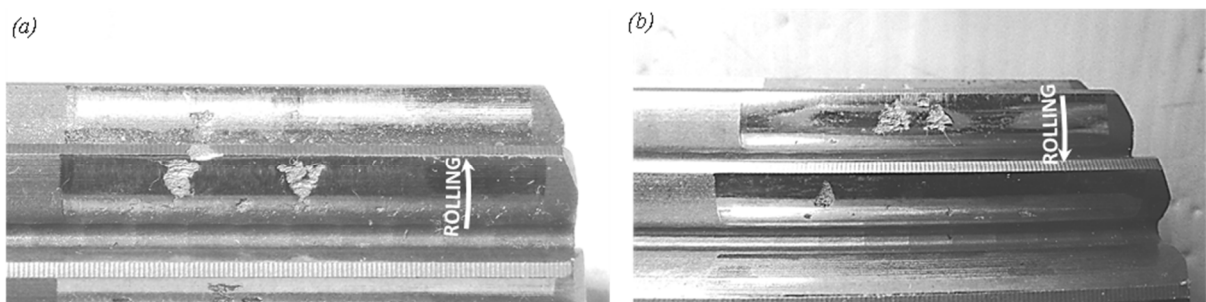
PSO macropitting observed on a driver (a) and driven (b) gear
